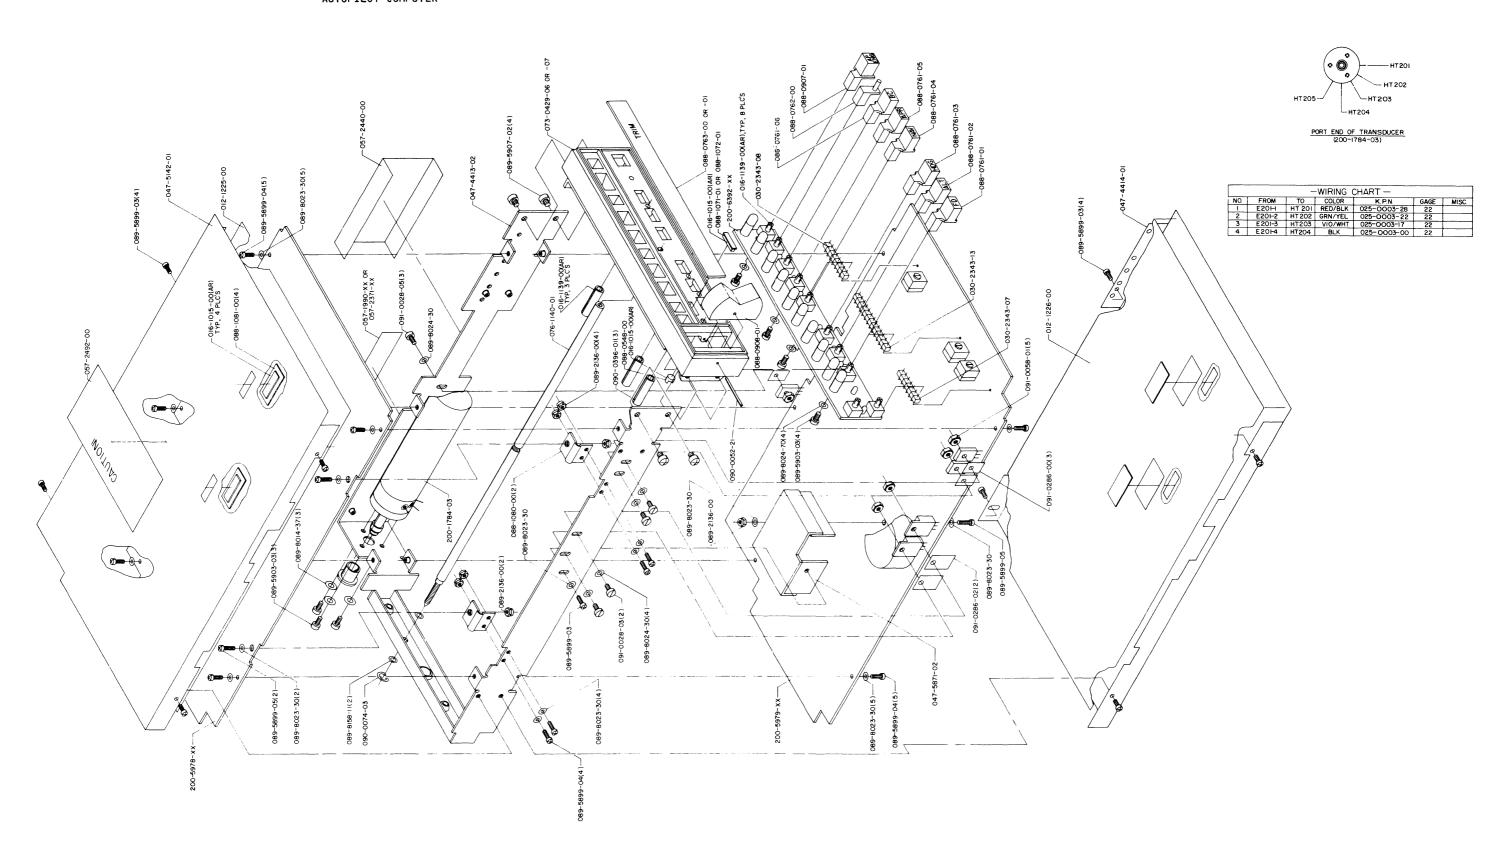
FLIGHT COMPUTER ASSEMBLY (Dwg. No. 300-2817-00, R-3)
